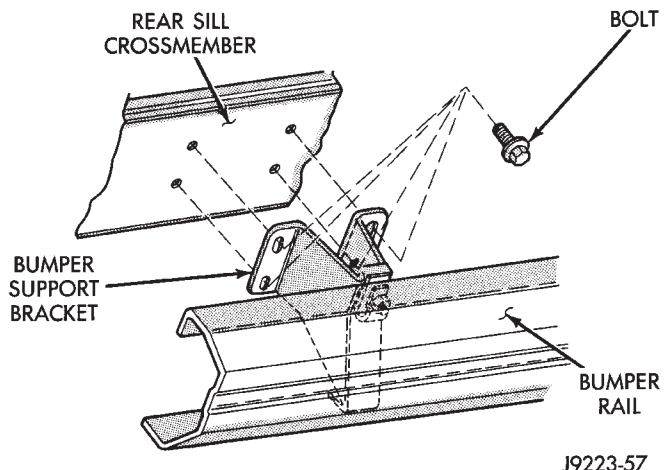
Rear Bumper Removal/Installation—XJ Vehicles
